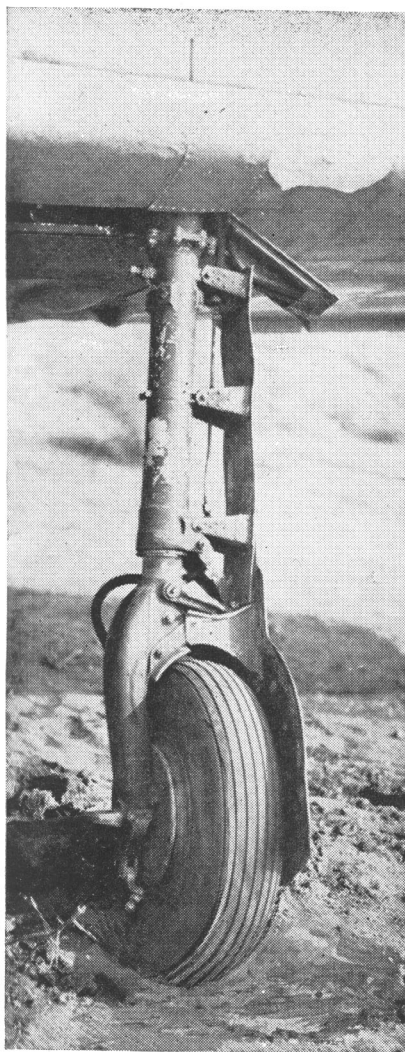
Left leg of the main landing gear. The wheel fork is built up of welded-steel stamping; legs are conventional steel forgings, 3½ in. in diameter with 3-in. oleos having 3½-in. stroke operating under about 230 psi. The wheel and tire together weigh only 28 lb. The close-up of the wheel (2) shows up-lock latch extending inward from the axle and small ball and swivel which closes the fairing completely to cover the wheel in a retracted position.
